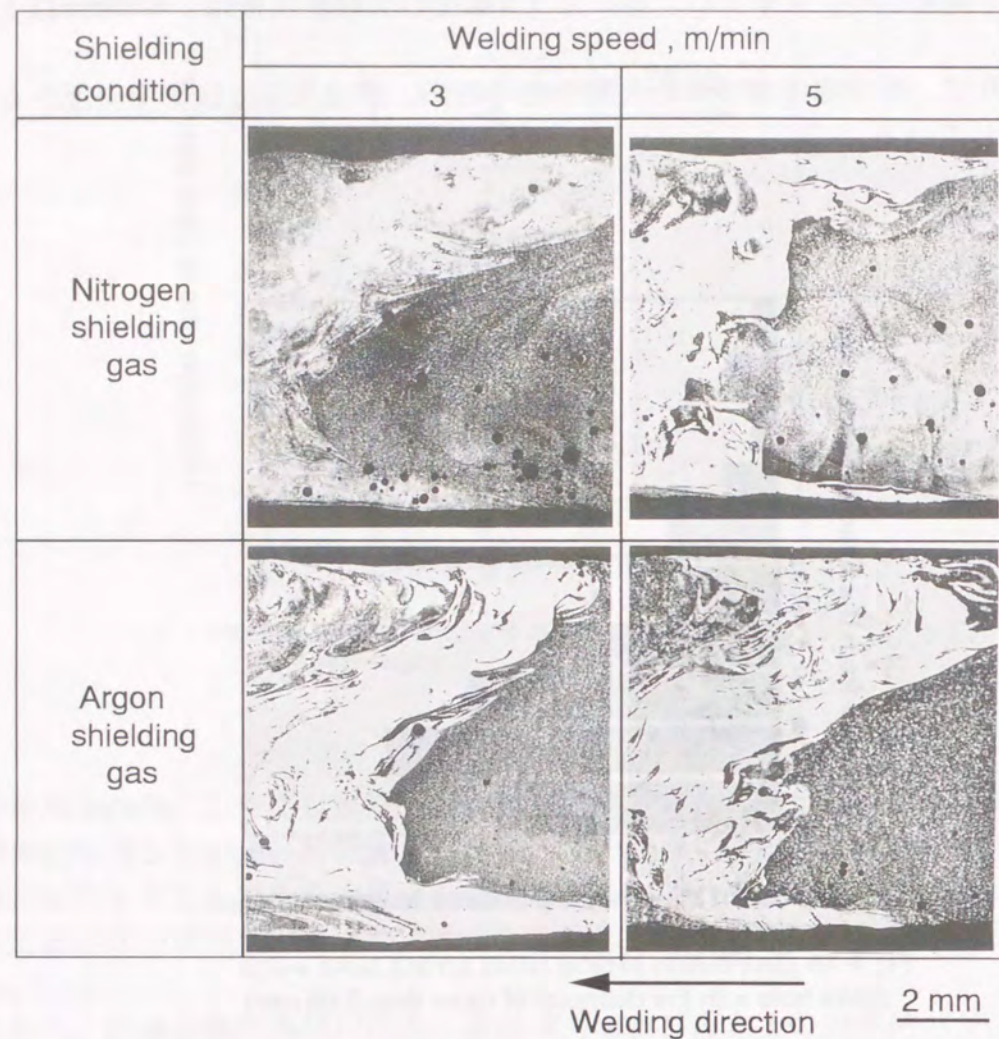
Solidification line in longitudinal macrosection of laser weld metals
